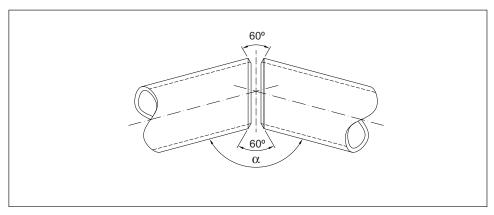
Joint preparation for hollow section mitre joints [1]
